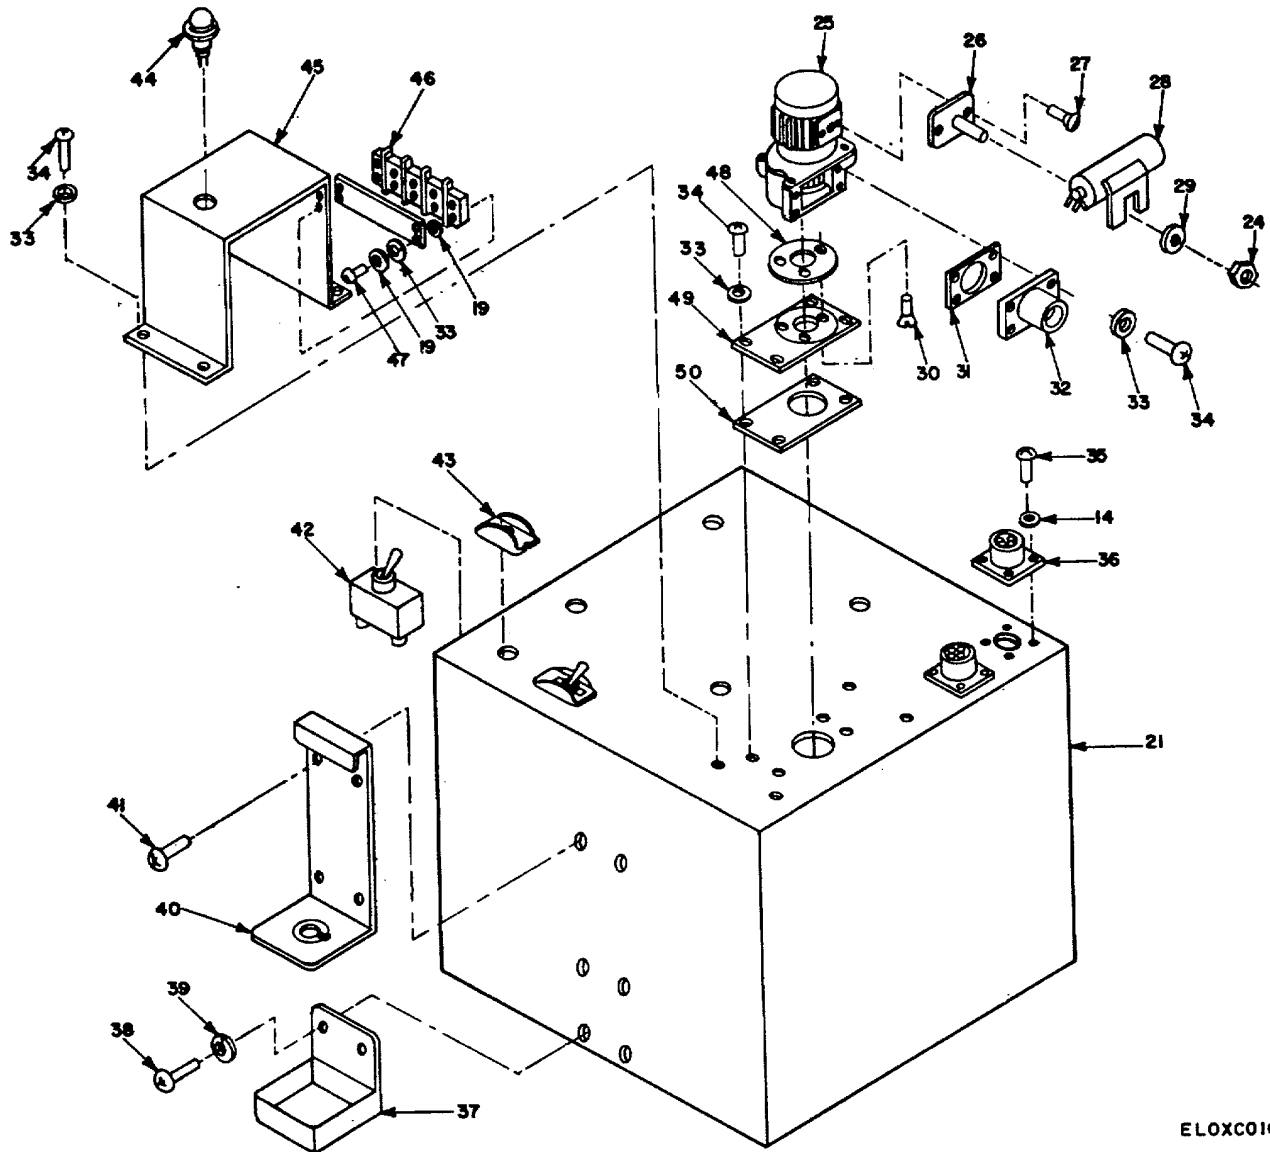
S-561/TTC-41 (V), Battery Exhaust Alarm Assembly.
